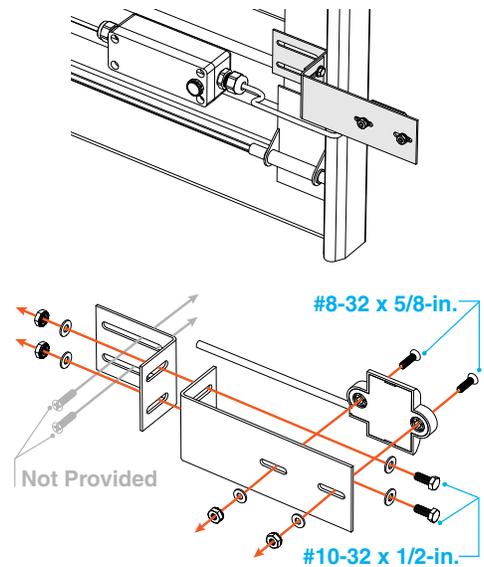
A: Sectional Doors: Receiver Bracket Assembly
